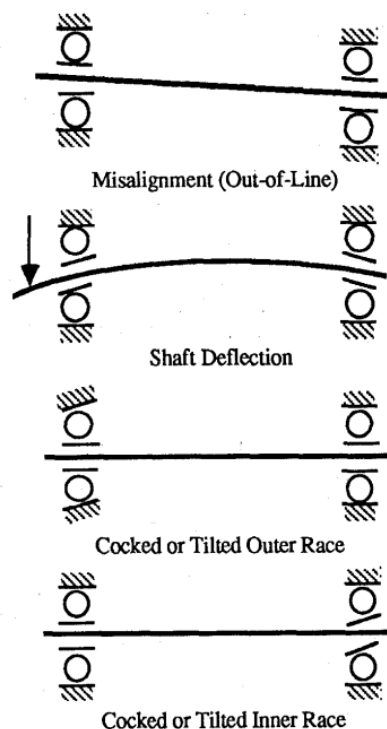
FOUR BEARING MISALIGNMENT EXAMPLES. (BARTFIELD, 1995)
